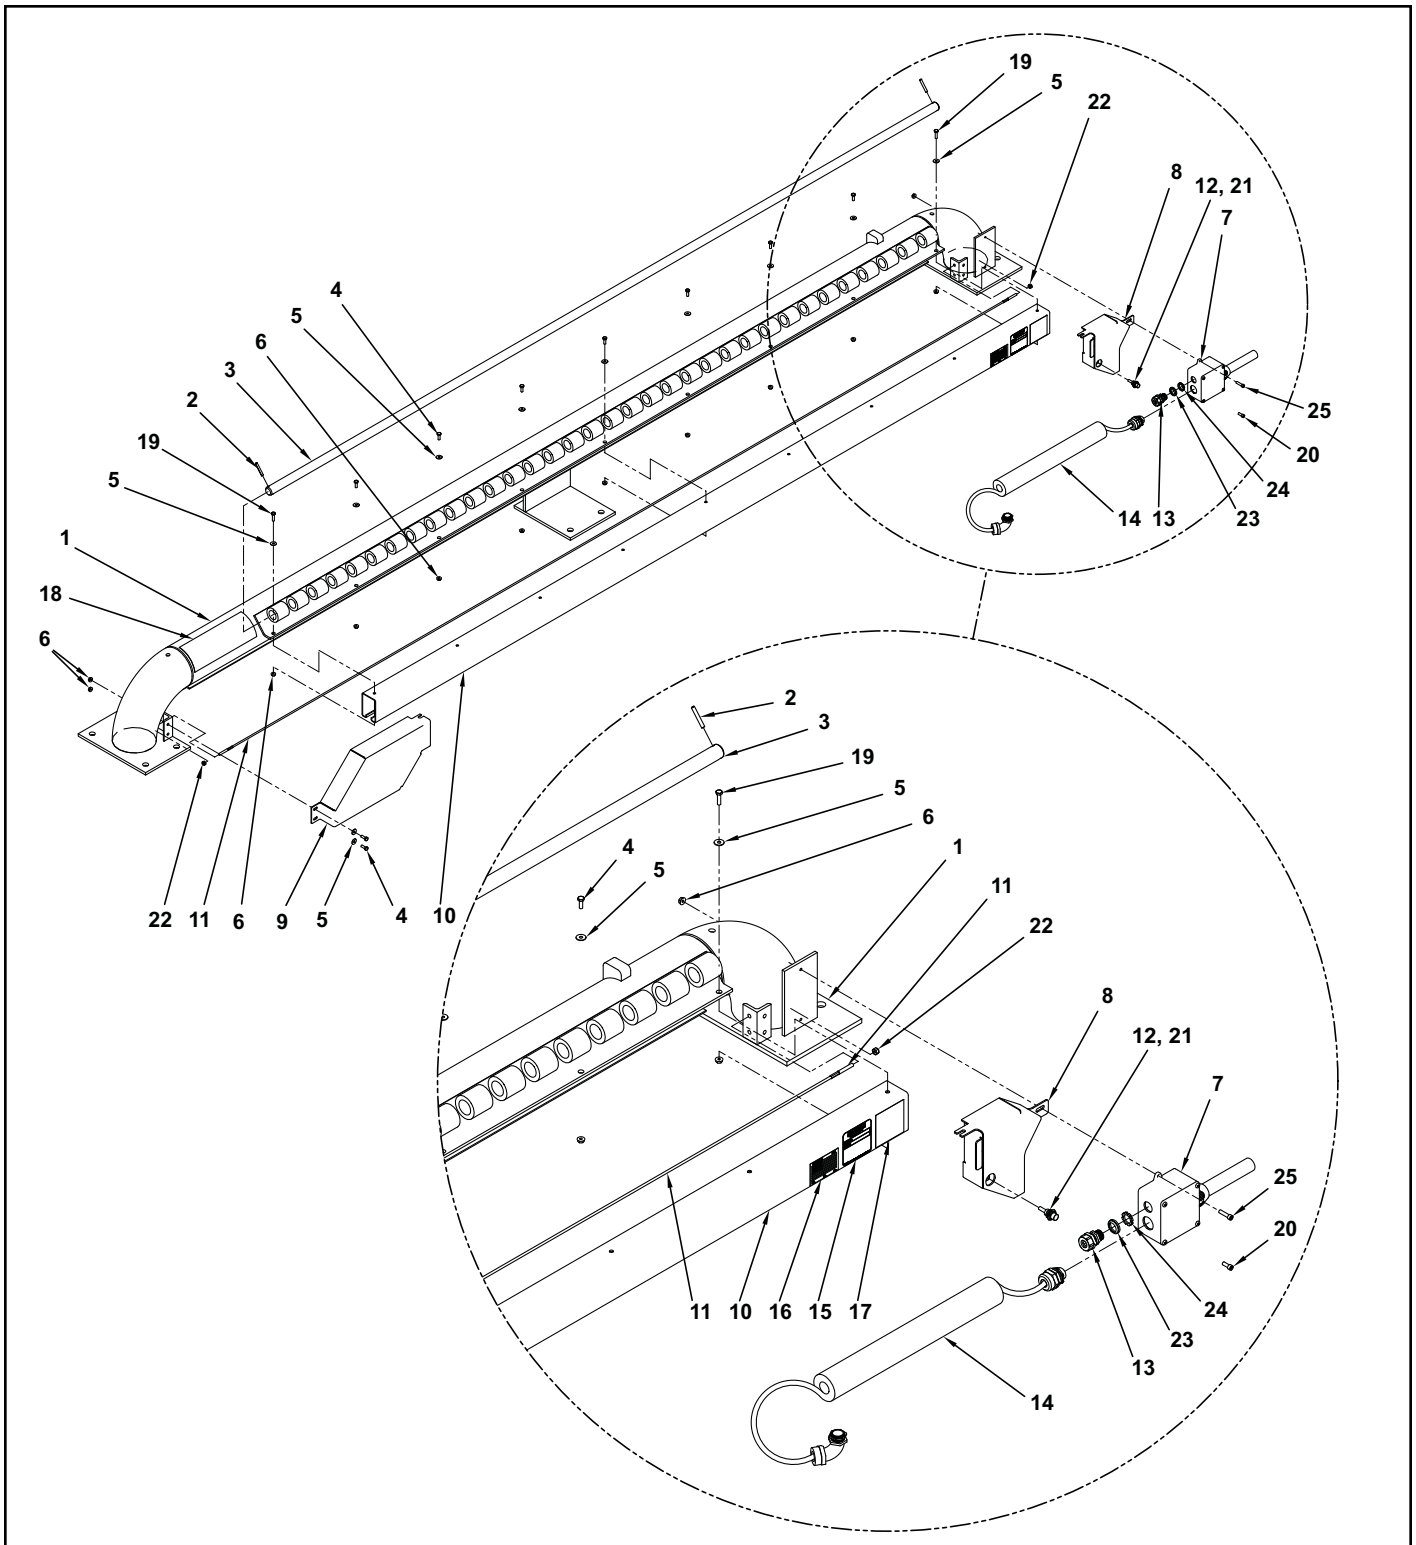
OUTSIDE LIGHT BOX WIRING
